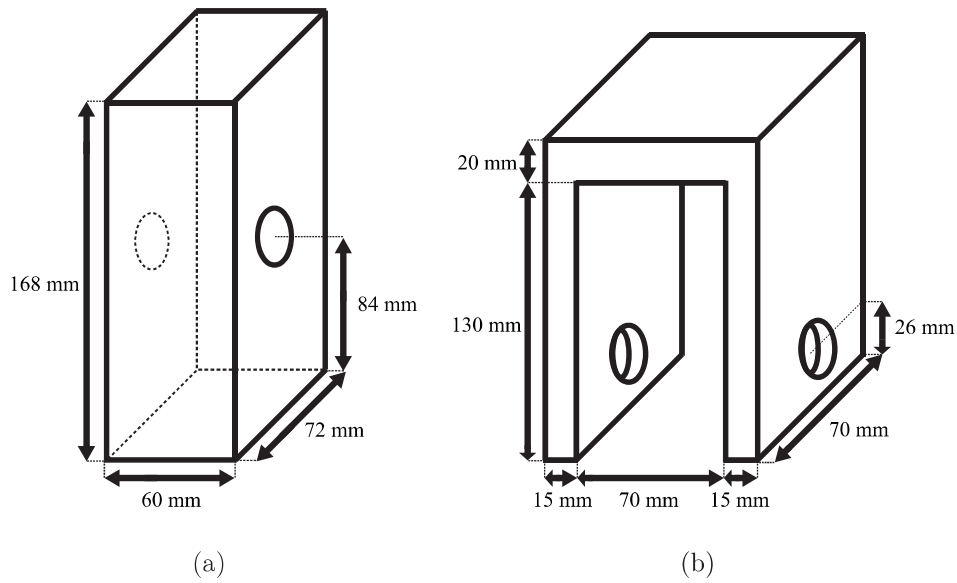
Illustration of test pieces: a) test principle; b) steel apparatus.
